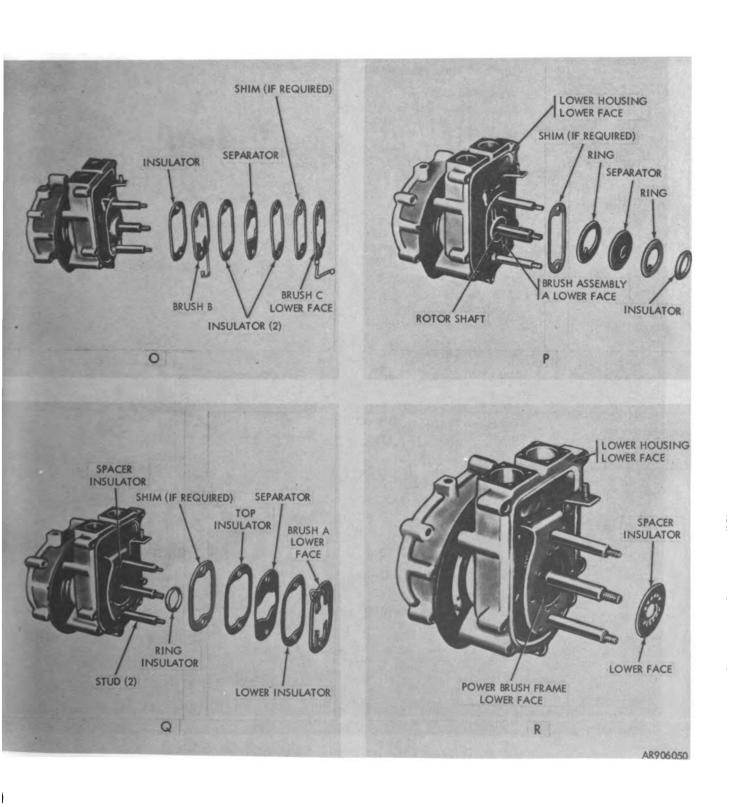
Slipring box disassembly or assembly (5 of 7).
